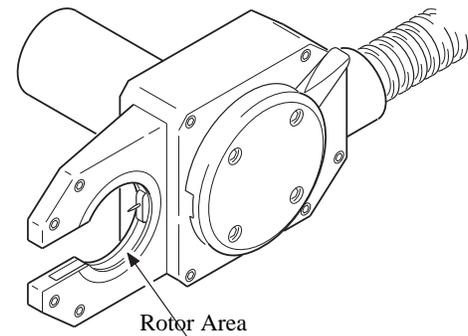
Inspect Exposed Surfaces of the Weld Head
